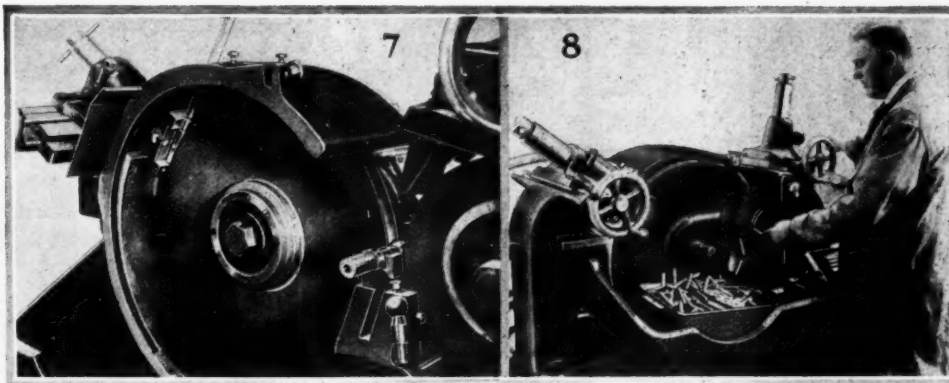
Unusual formed surfaces produced by formed wheel and in-feed type of operation
